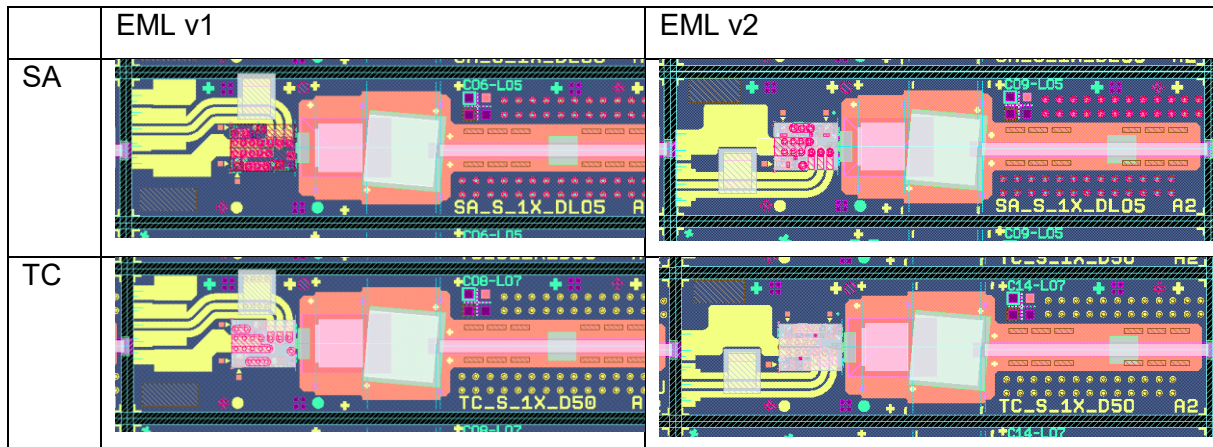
final base layout of the 3D Silicon submount, for self-alignment and Thermocompression for two chip version (v1, v2) for precise passive alignment of Flip chip laser, Lens, Isolator and fiber for building a Transmitter Submodule.
